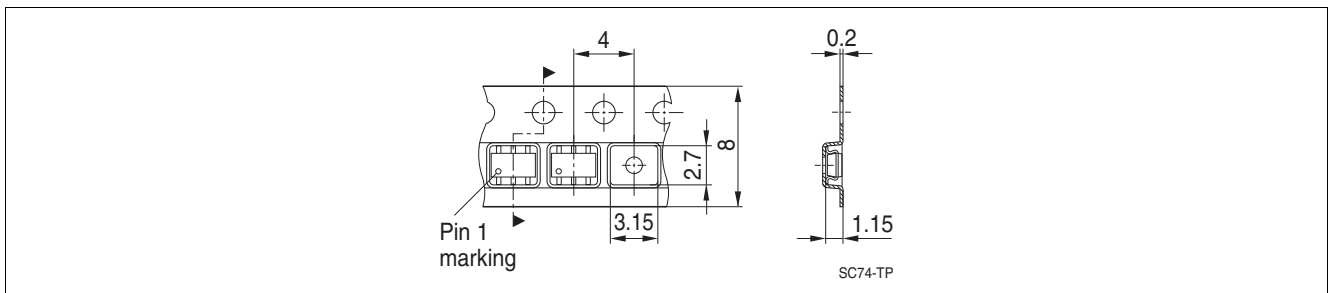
Tape and Reel Information for SC74 (dimensions in mm)
